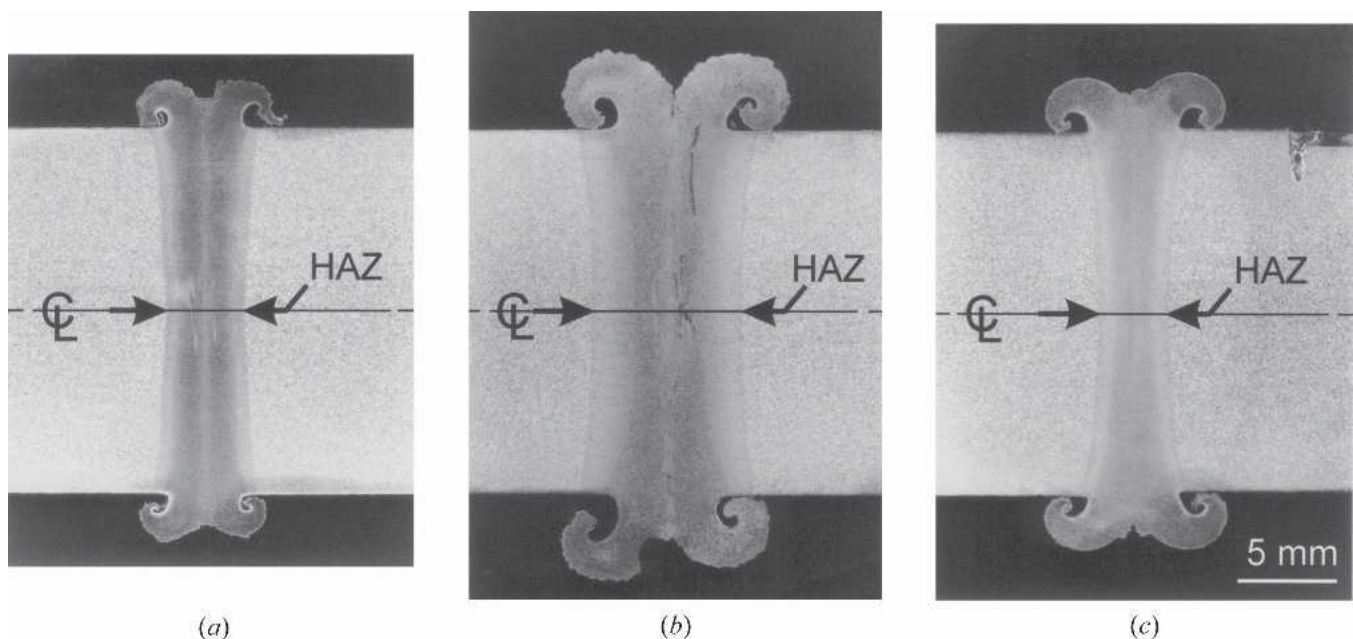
Transverse sections of friction welds made between 19-mm ($\frac{3}{4}$ -in.)-diameter AISI/SAE 1045 steel bars using (a) optimal, (b) long-time, and (c) hard and fast welding conditions.
